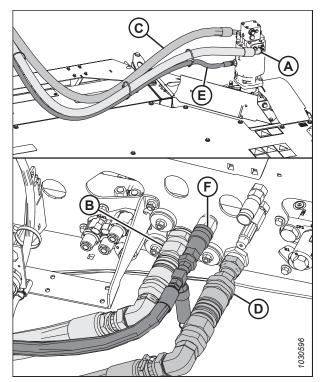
Hydraulics and Electrical – Rotary Disc Configuration with Quick Couplers Installed
